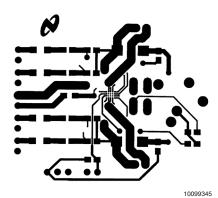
Recommended 20-pin micro SMD PC Board Layout:
